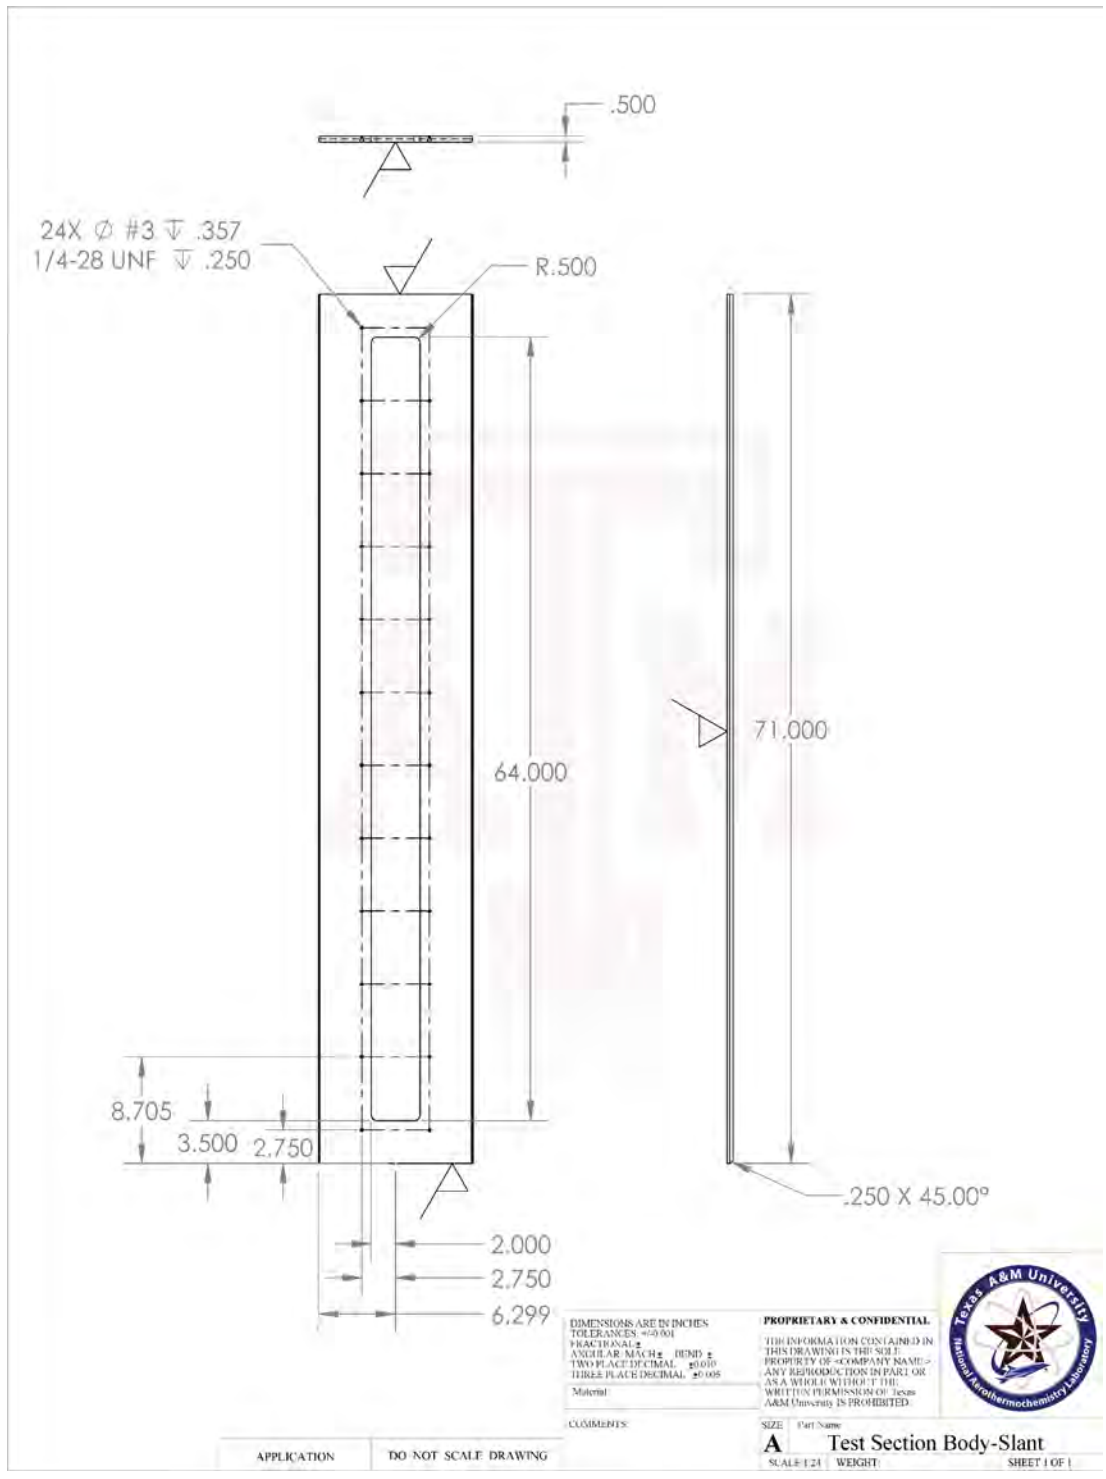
DIMENSIONAL DRAWING FOR THE DIAGONAL PLATES OF THE TEST SECTION SKELETON.
